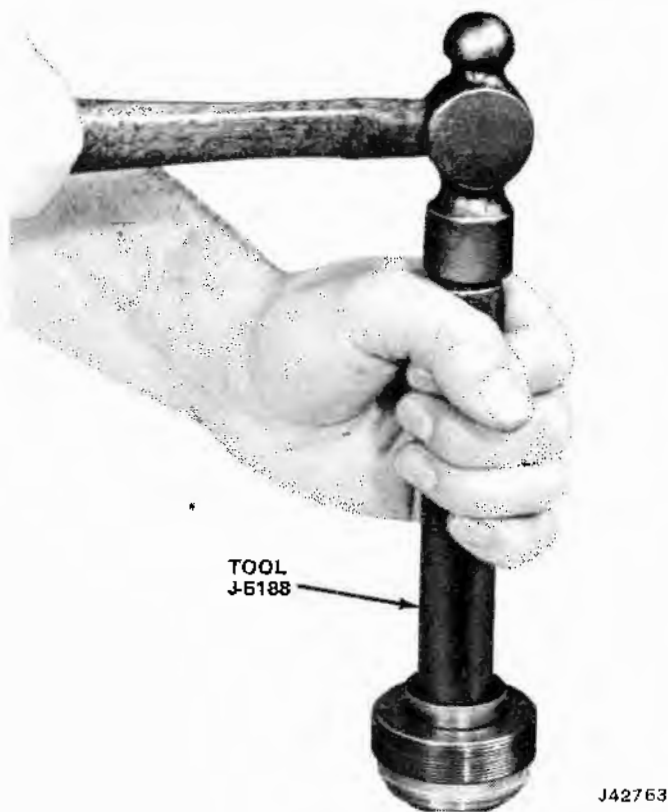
Installing Stub Shaft Seal in Adjuster Plug
